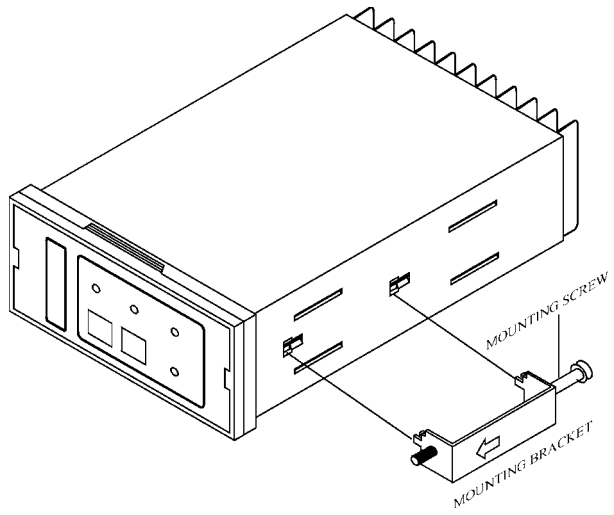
PANEL METER WITH MOUNTING BRACKET AND SCREW
